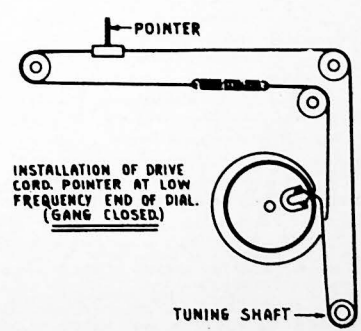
TUNING DRIVE CORD AND POINTER ARRANGEMENT.
